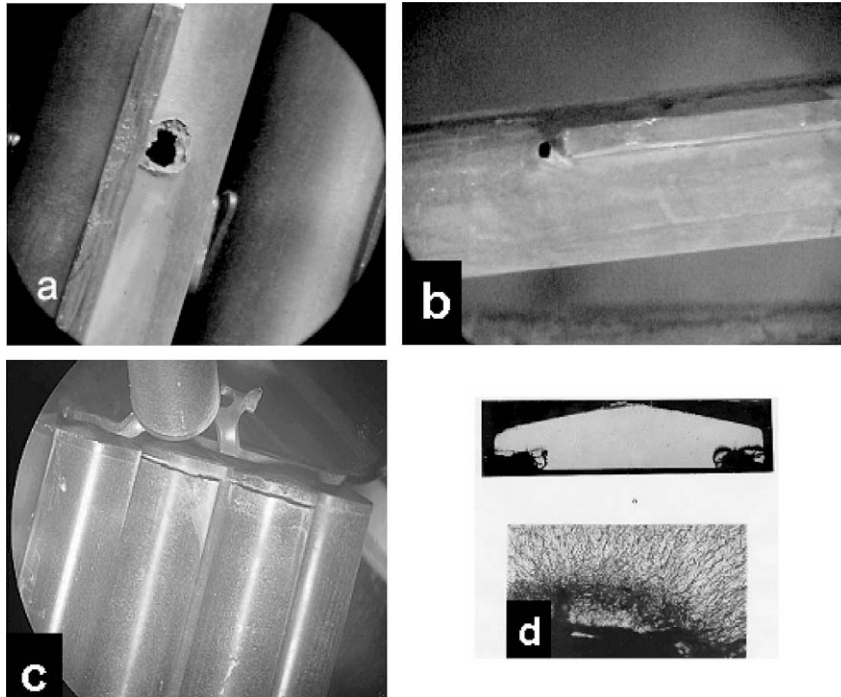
(a) Pin hole in the clad due to hydride blister, (b) pin hole due to bearing pad damage, (c) cracks at the end plugs and (d) hydridding at the end plug.
